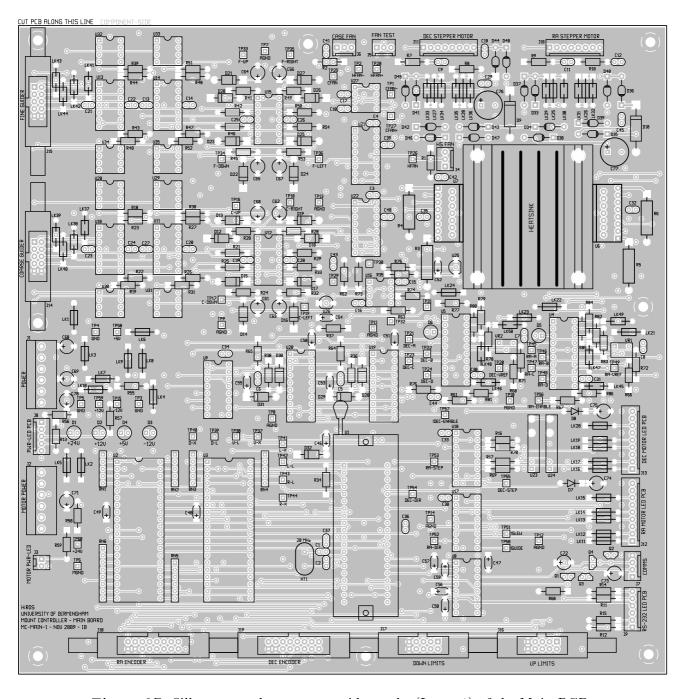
Silkscreen and component-side tracks (Layer 1) of the Main PCB.
